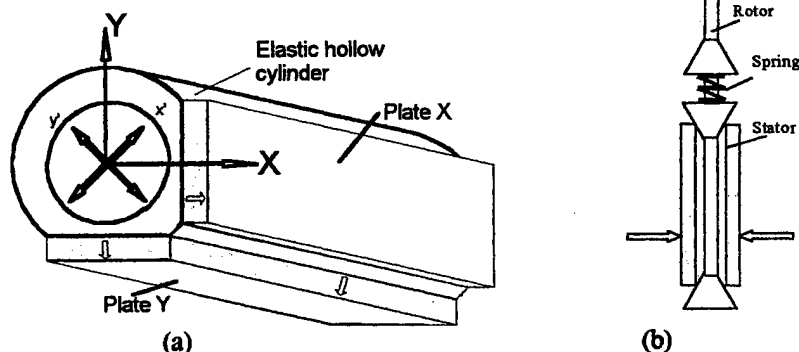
(a) Structure of a metal tube stator, and (b) assembly of the motor.
